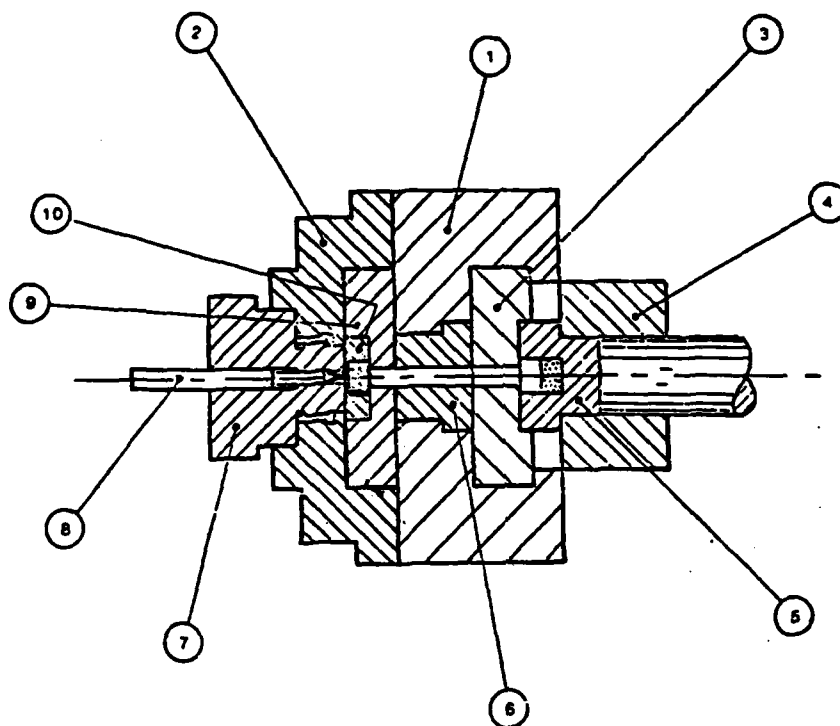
Radial pressure bar; rubber holder pellet system - assembly method for percussion fired detonators.
